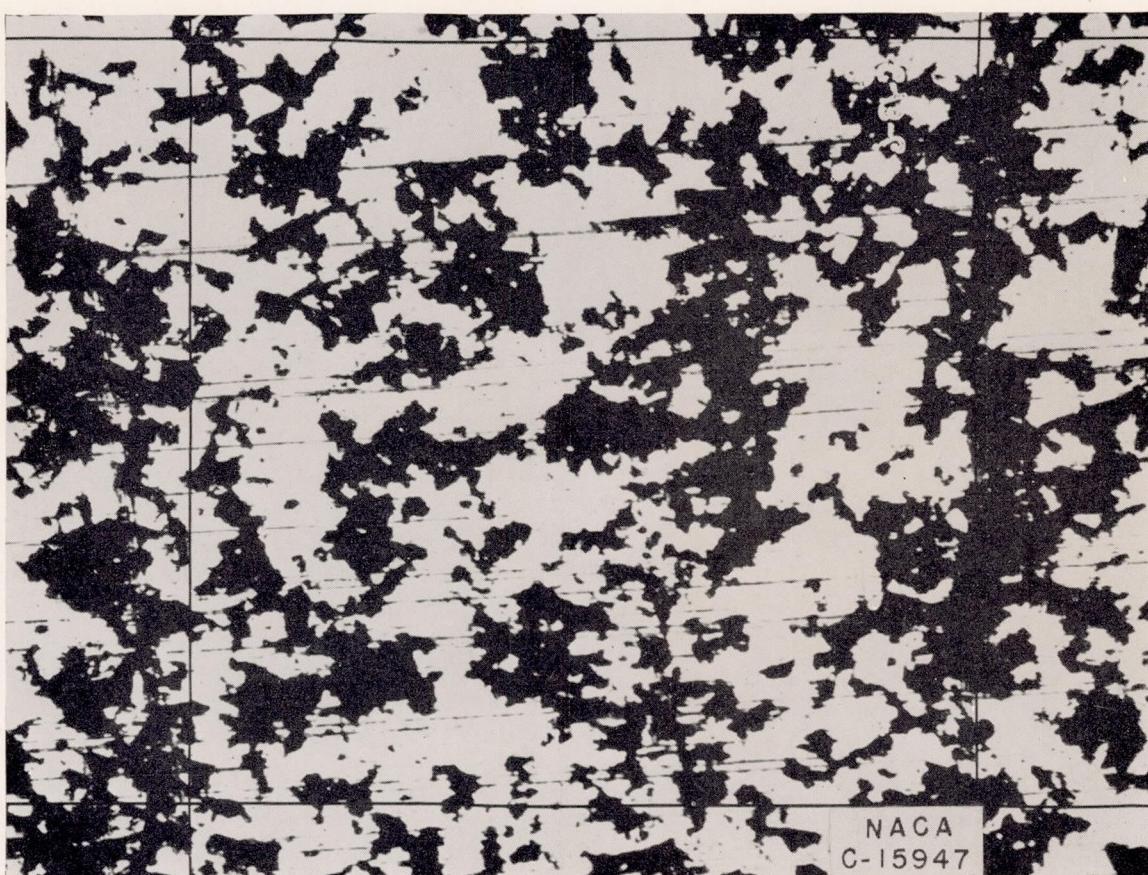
Concluded. Appearance of piston and rings after runs in porous chrome-plated cylinder. Run 3, table V.
